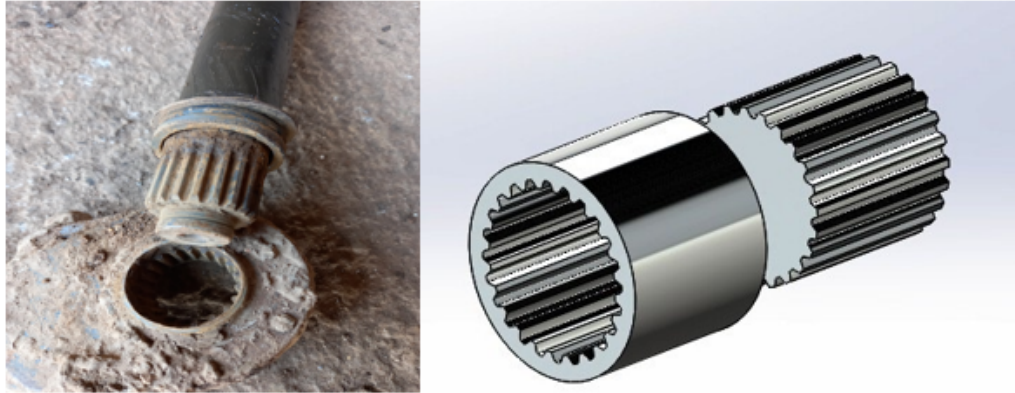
Exploded drawing of internal and external involute splined shaft
